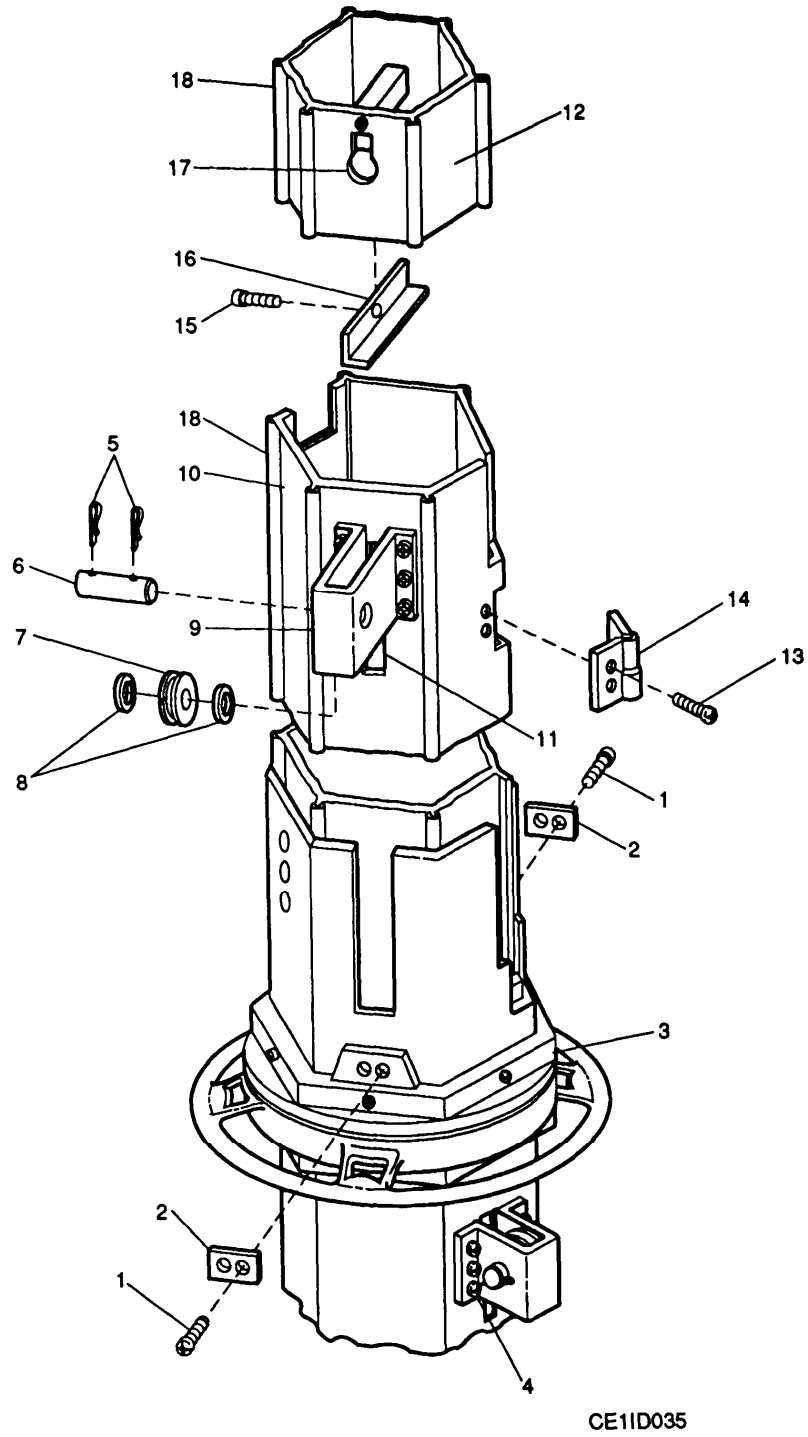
Mast Assembly Section 3 Hoisting Rope Replacement
